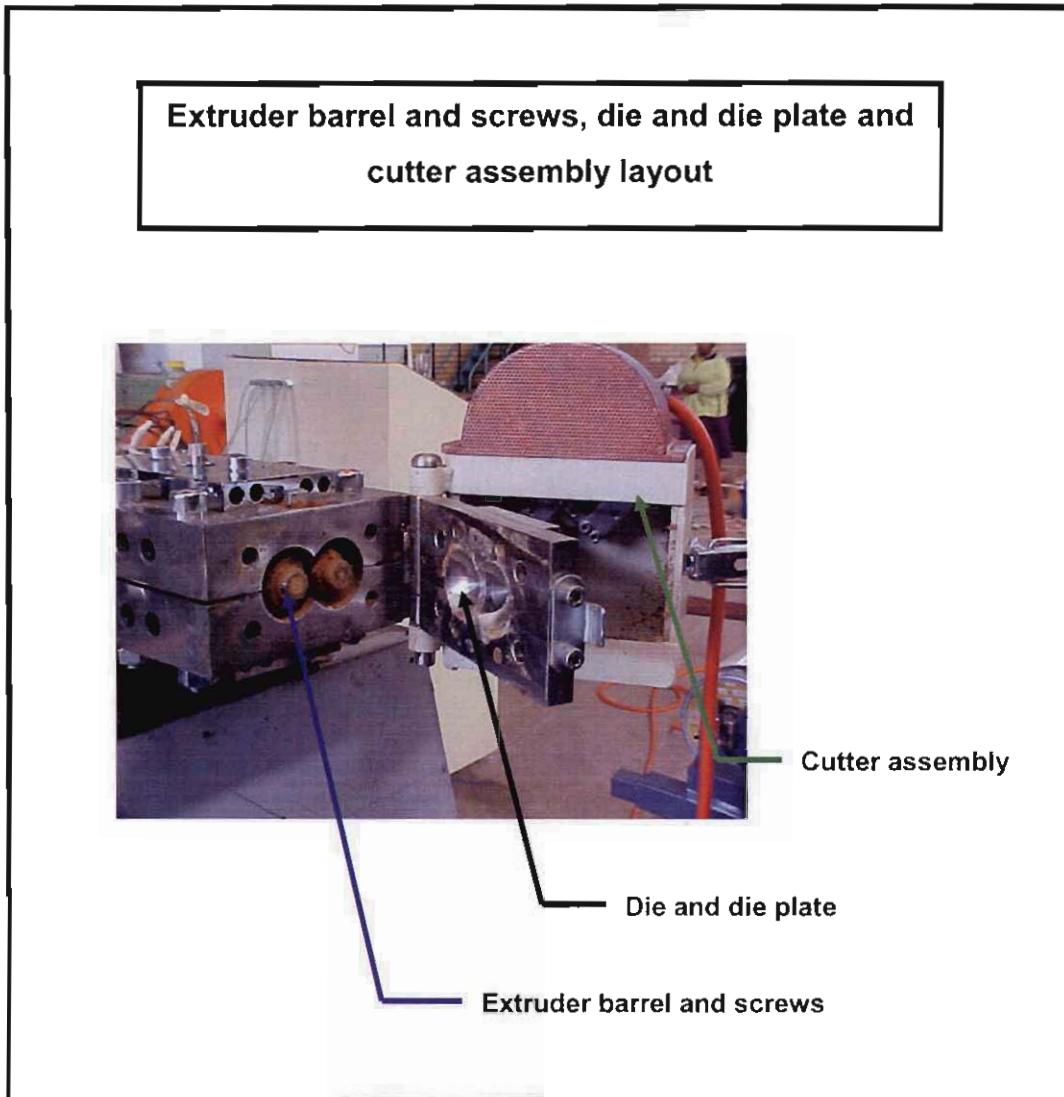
Extruder barrel and screws. Die and die plate and cutter assembly layout.
